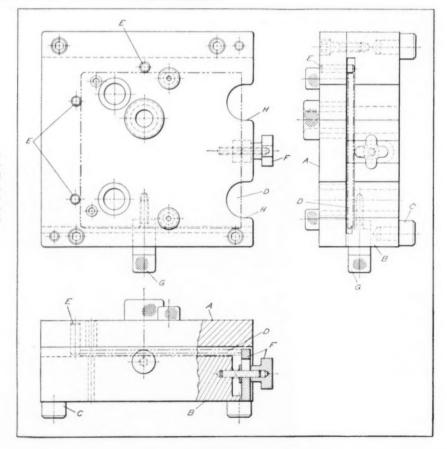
The body and bushing plate of the drawer type drill jig are screwed and doweled together. Parts to be drilled are slipped into a recess, in the manner of closing a drawer, and locked in place.
